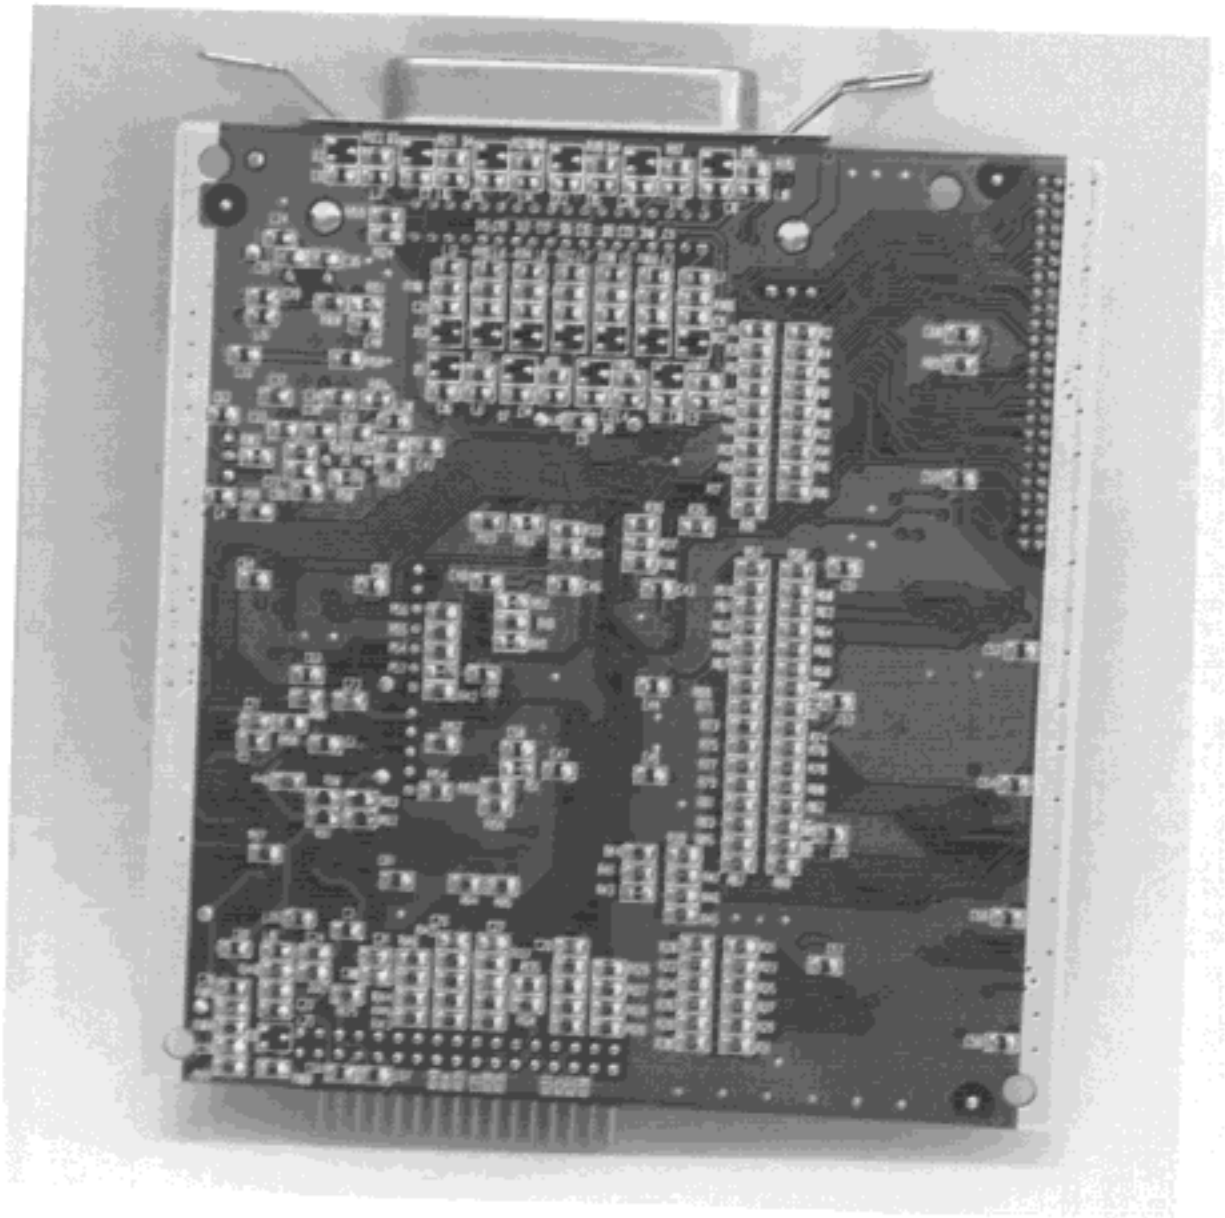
DIGITAL BOARD COMPONENTS SIDE
